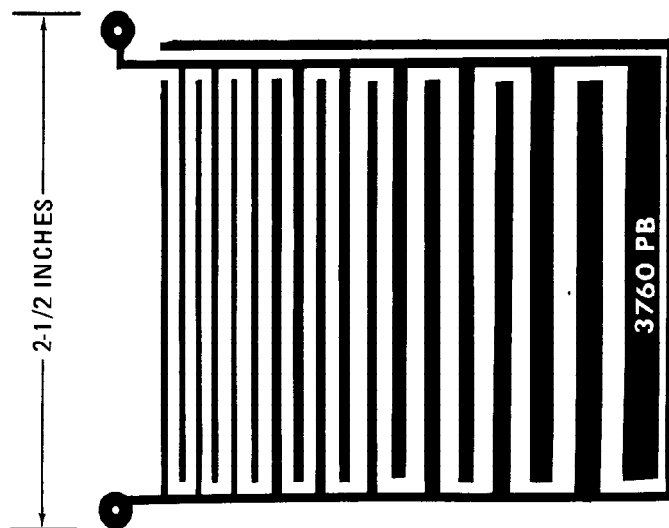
PITCH BENDER PC BOARD SHOWN FULL-SIZE.
